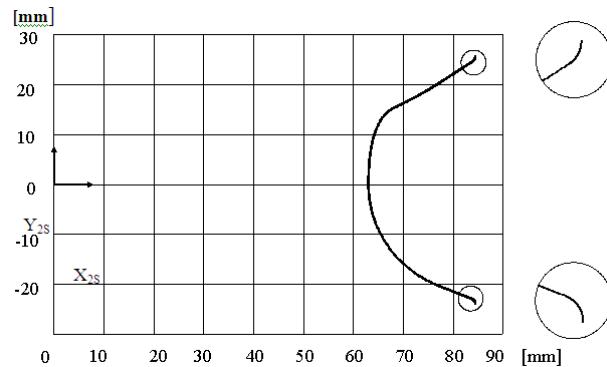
The axial section profile of the hob cutter for the female rotor
